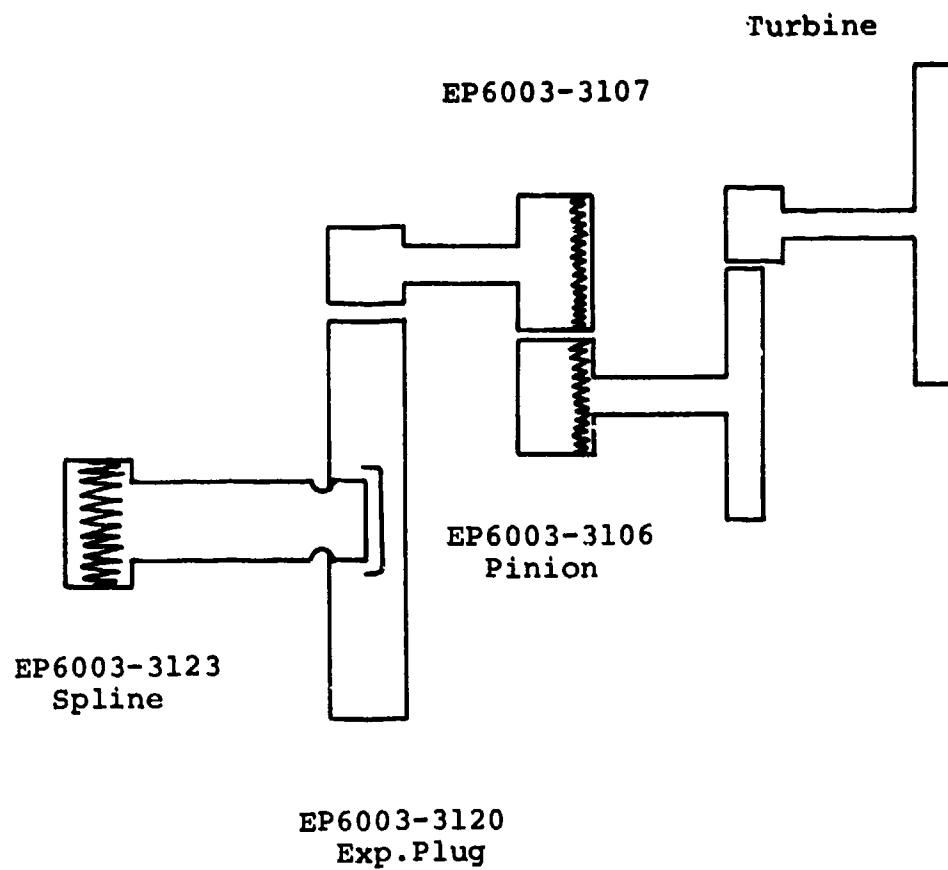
SCRM S/N 1 Gearbox and Geartrain.
